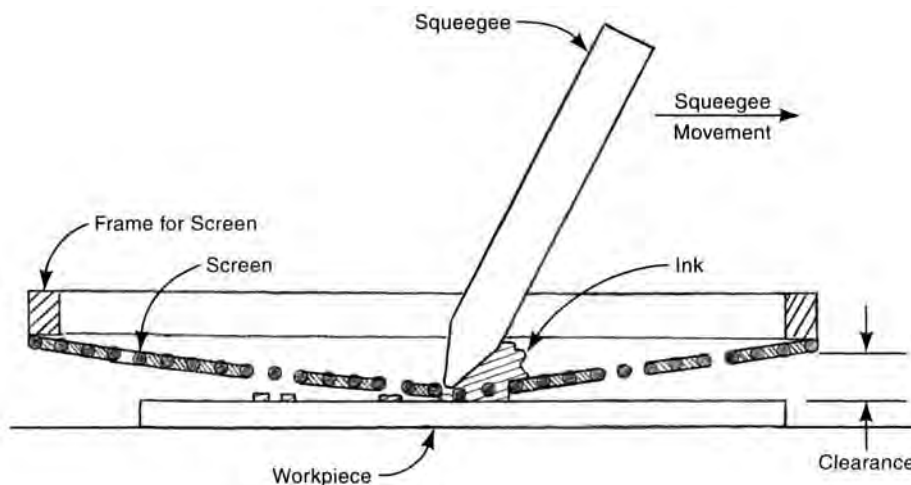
D4b The screen printing process. A flexible squeegee presses ink through the openings of a coated screen, leaving an image on the workpiece - a sheet of paper, other sheet material or product component that is positioned below the screen.
